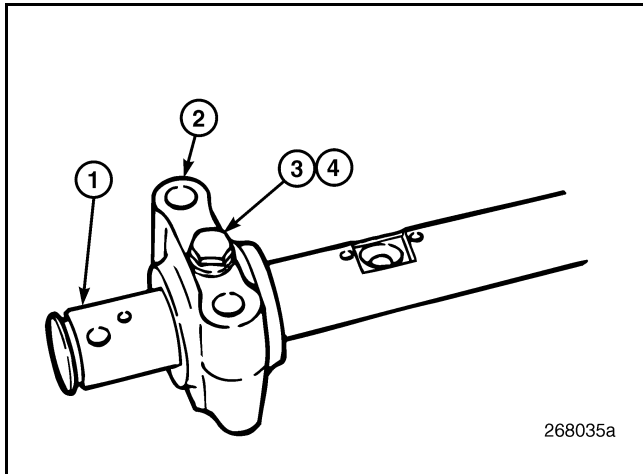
Rocker Shaft/Front Mounting Bracket Assembly
